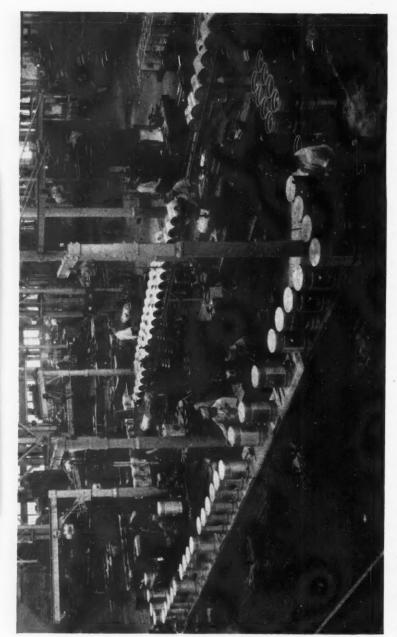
View of the piston line. The pistons move from one operation to another on a roller conveyor, and the equipment is set up in the form of a rectangle.
